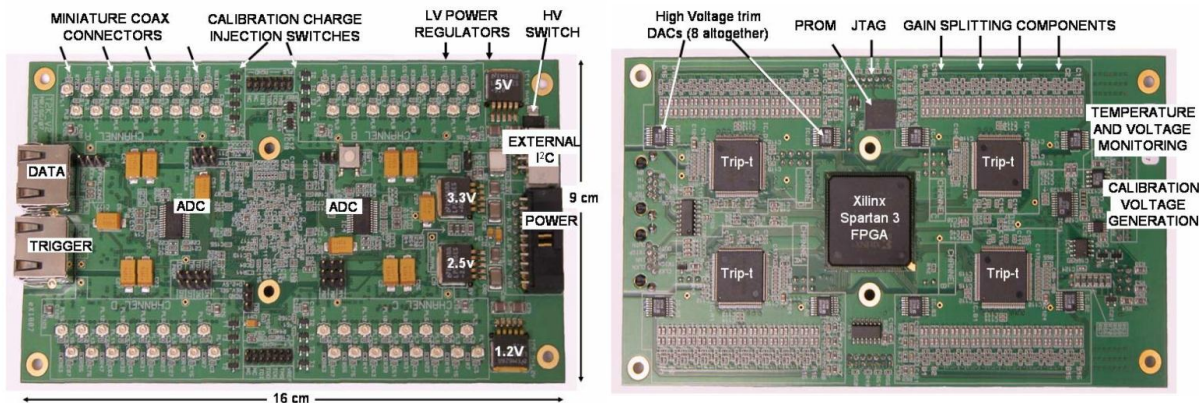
Photograph of the TFB top surface (left) and its bottom surface (right).
